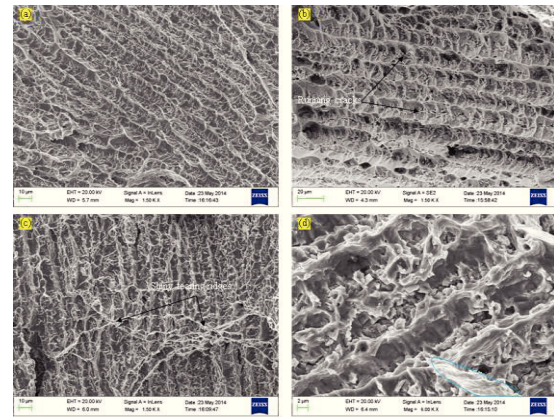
SEM fractograph of impact tested samples showing CCGTA weldment employing (a) ER2553 (b) ERNiCrMo-4; PCGTA weldment employing (c) ER2553 (d) ERNiCrMo-4 filler respectively
